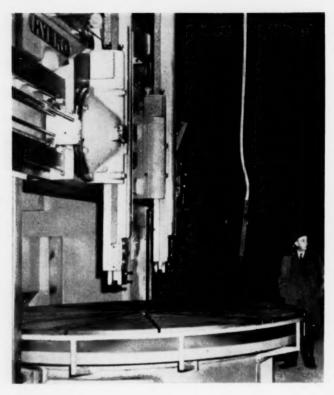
Shown here is a view of a Hyproboring machine which has a maximum swing of 151 inches and height under rail of 86 inches.
